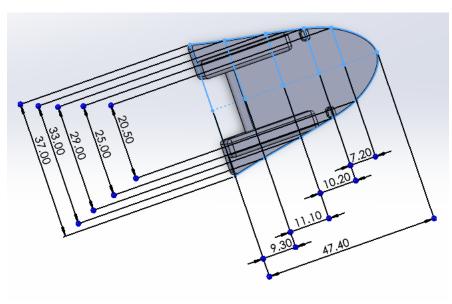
Shape Dimensions of Final Base Design. *In this figure, the dimensions used to make the shape of the base are shown.
